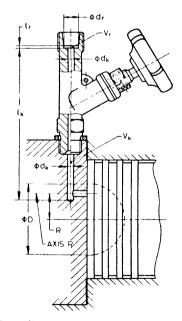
DIMENSIONS FOR FORM B INDICATOR VALVES (FORM BV REPRESENTED)
